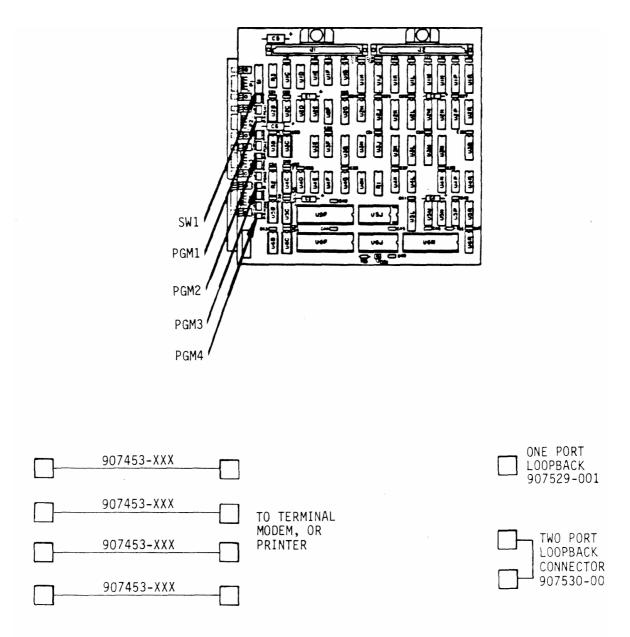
Location of Switches on 4-Way Controller PCBA
